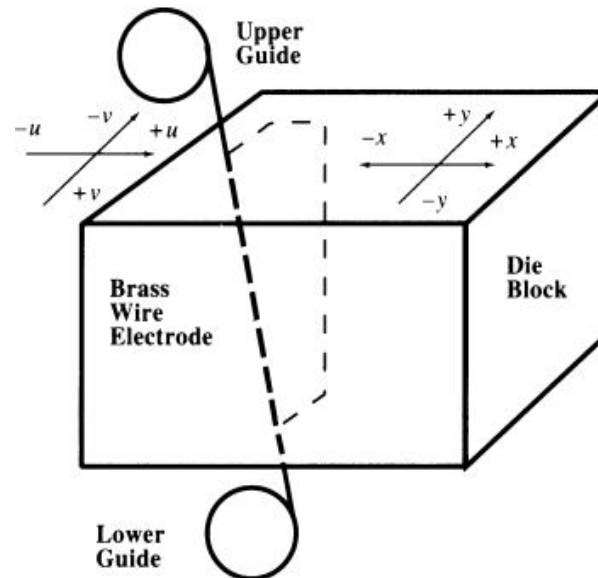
Wire kind EDM Machines are used to cut stamp dieprofilese.
